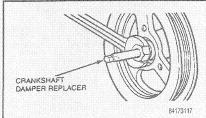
Installing the crankshaft damper with the proper installation tool—4.6L engine
